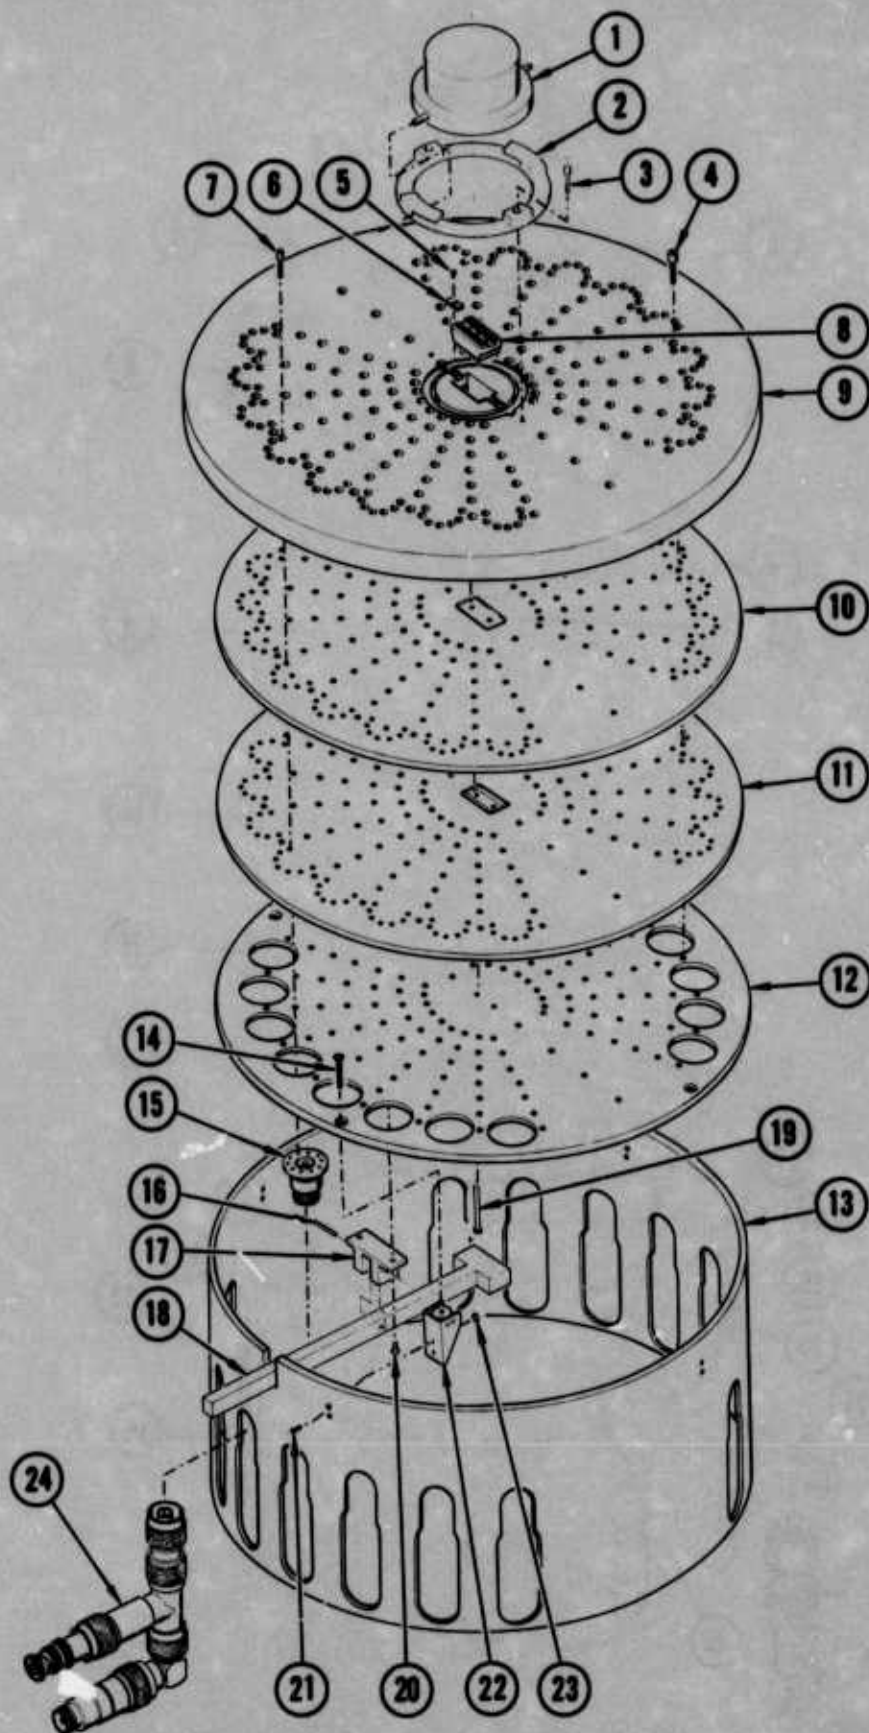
Dual In-Line Package Test Fixture - Exploded View
